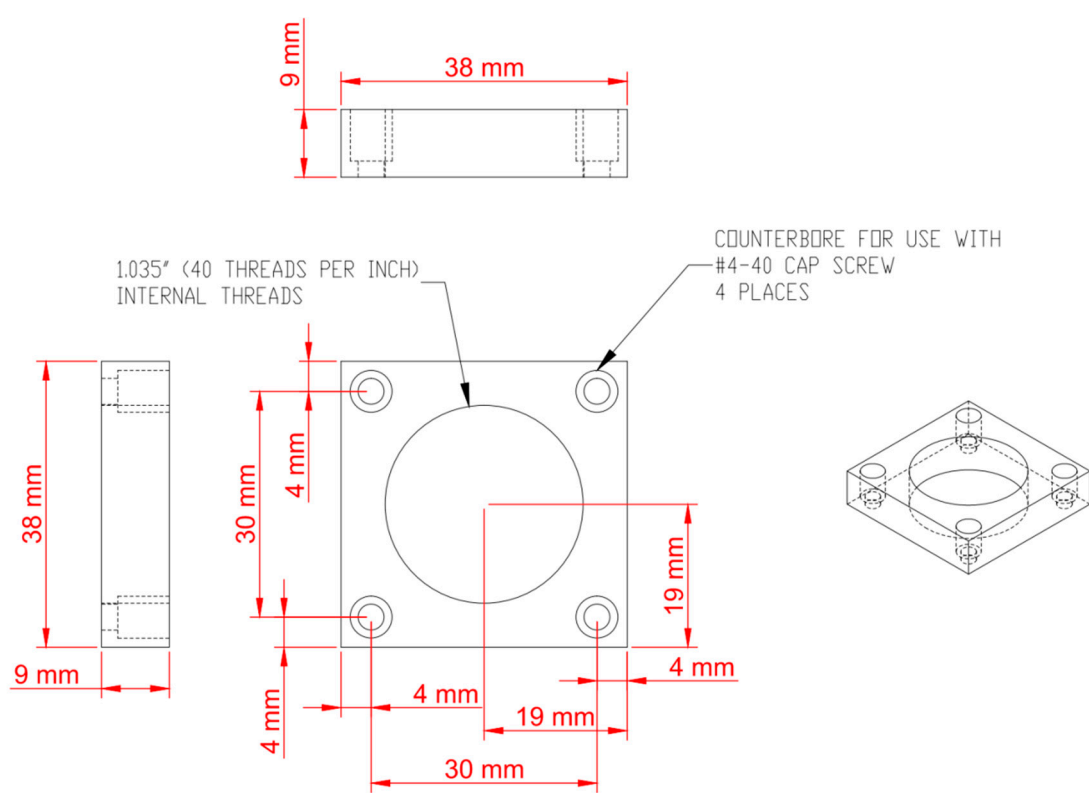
Detailed mechanical drawing of Part 4 from Figure S1.
